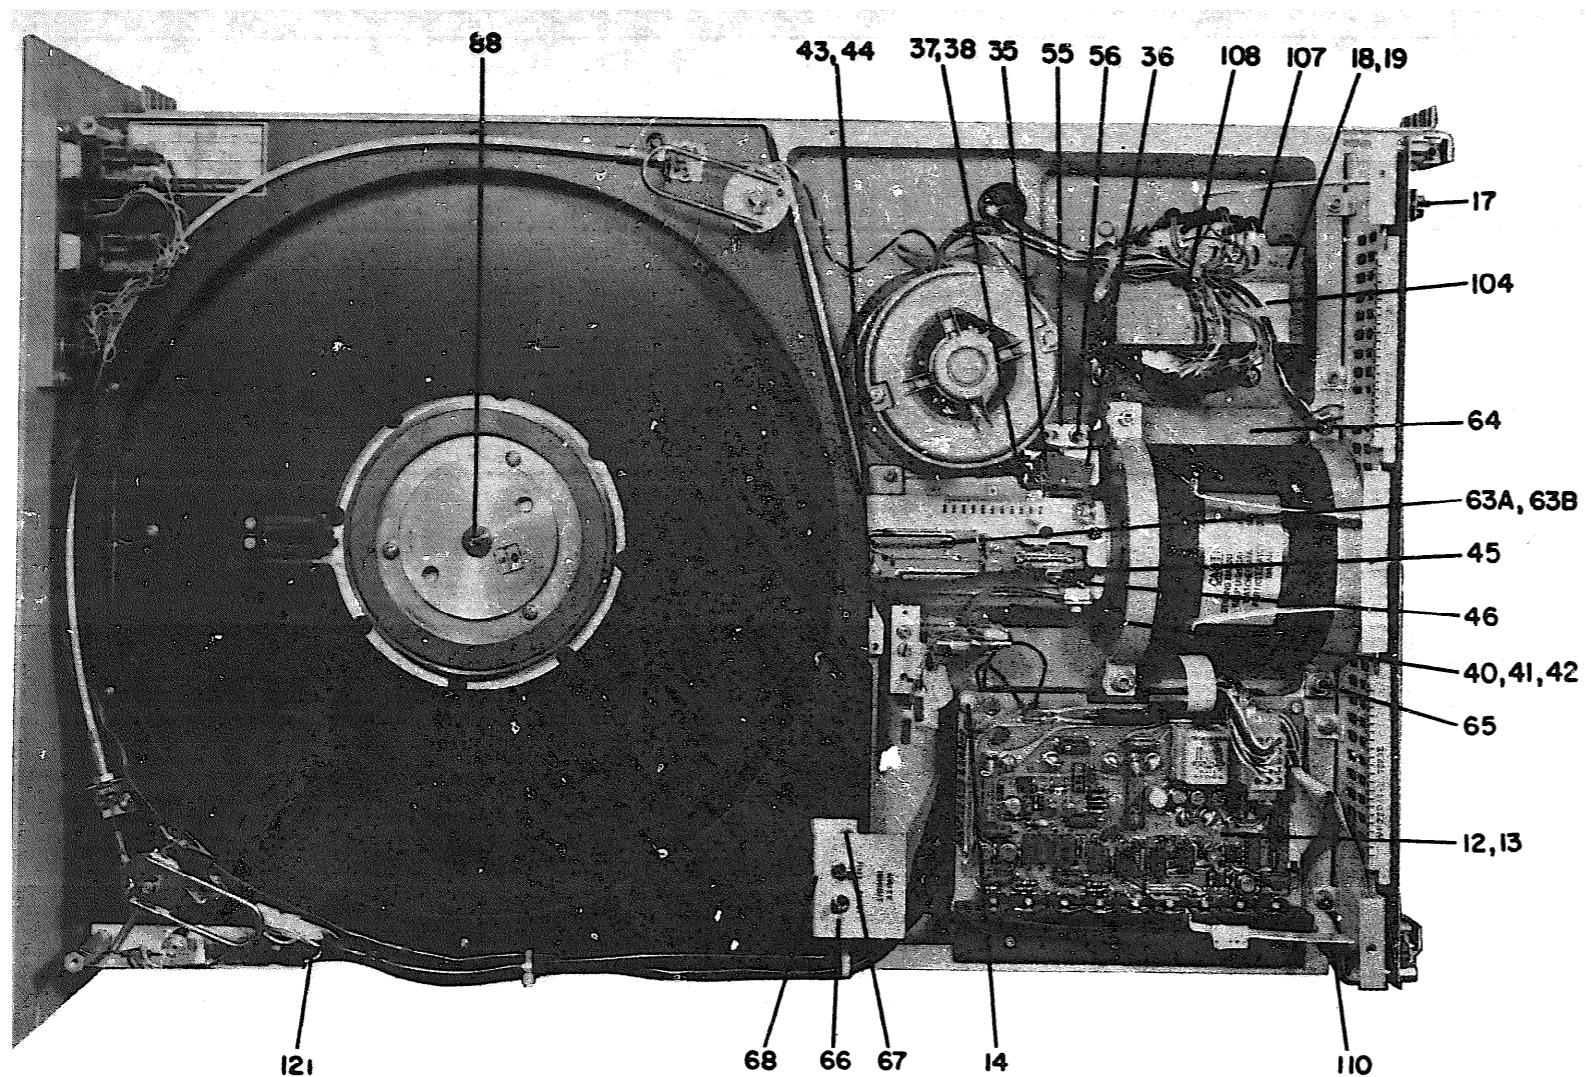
Disc Drive Assembly (Sheet 3 of 5).
